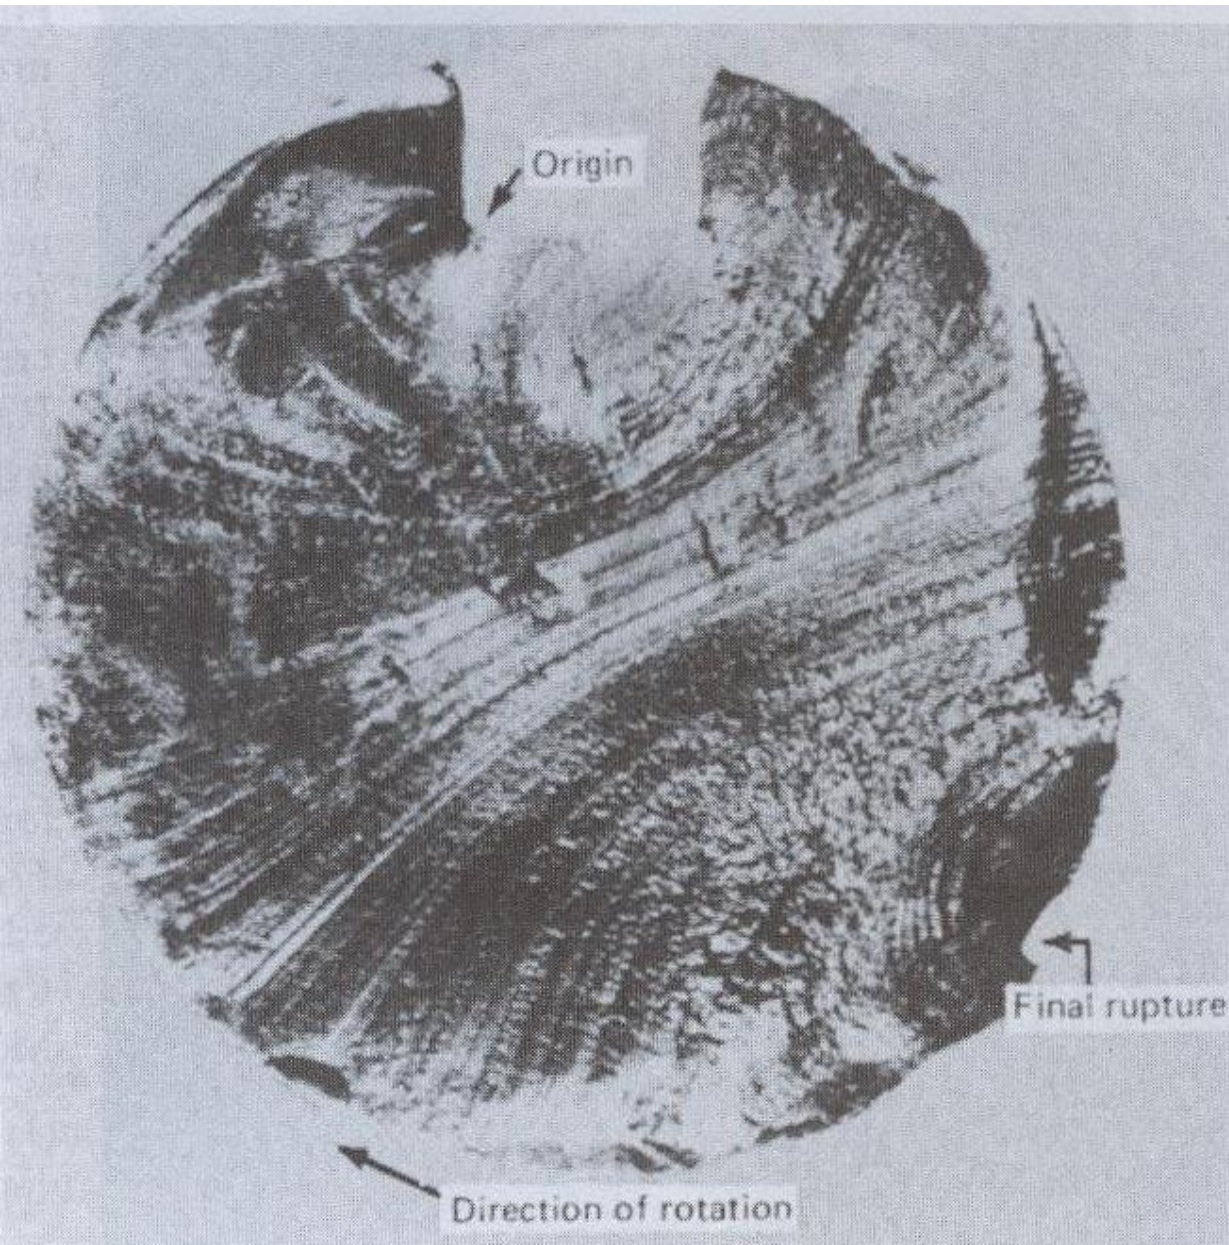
Fracture surface of a rotating steel shaft that experienced fatigue failure. Beachmark ridges are visible in the photograph. (Reproduced with permission from D. J. Wulpi, *Understanding How Components Fail*, American Society for Metals, Materials Park, OH, 1985.)
